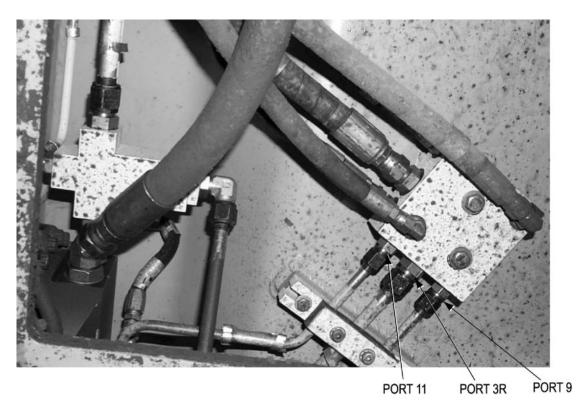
Existing Forward Right Manifold Assembly (Being Replaced)
